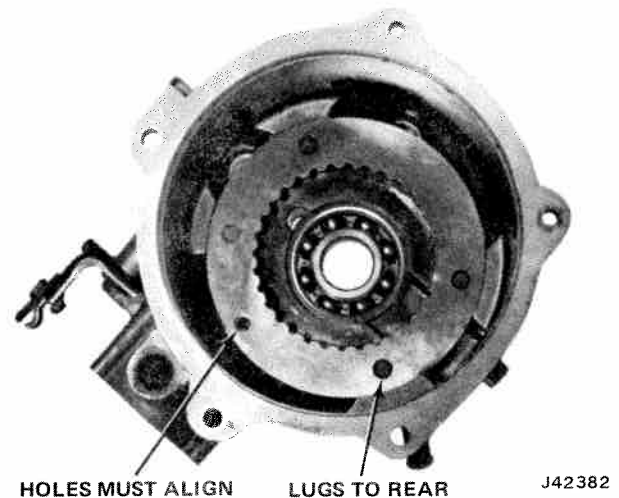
Reduction Holding Plate Indexed Properly in Case
